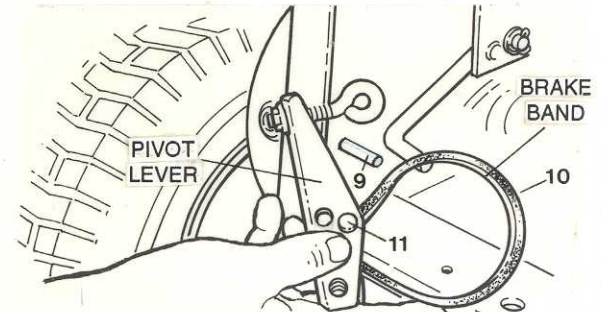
BRAKE PIVOT LEVER & BAND REMOVAL
